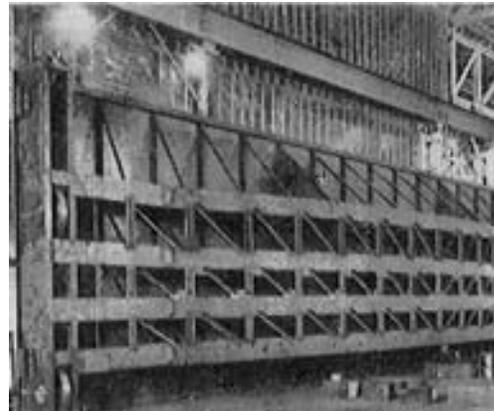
Fixed wheel gate shop assembly, Red Bluff Diversion Dam.
